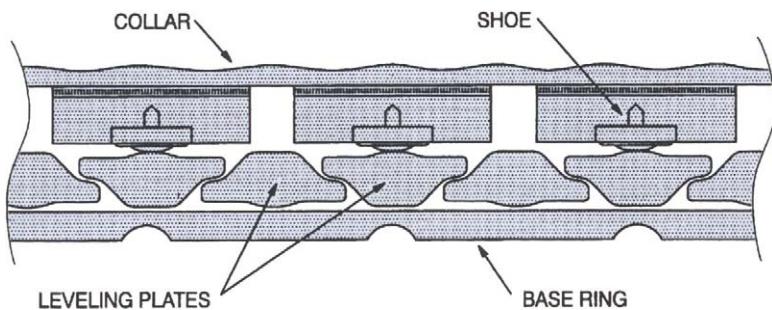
Self-equalizing tilt-pad thrust bearing (View – looking down on assembly) (Courtesy of Kingsbury, Inc)
